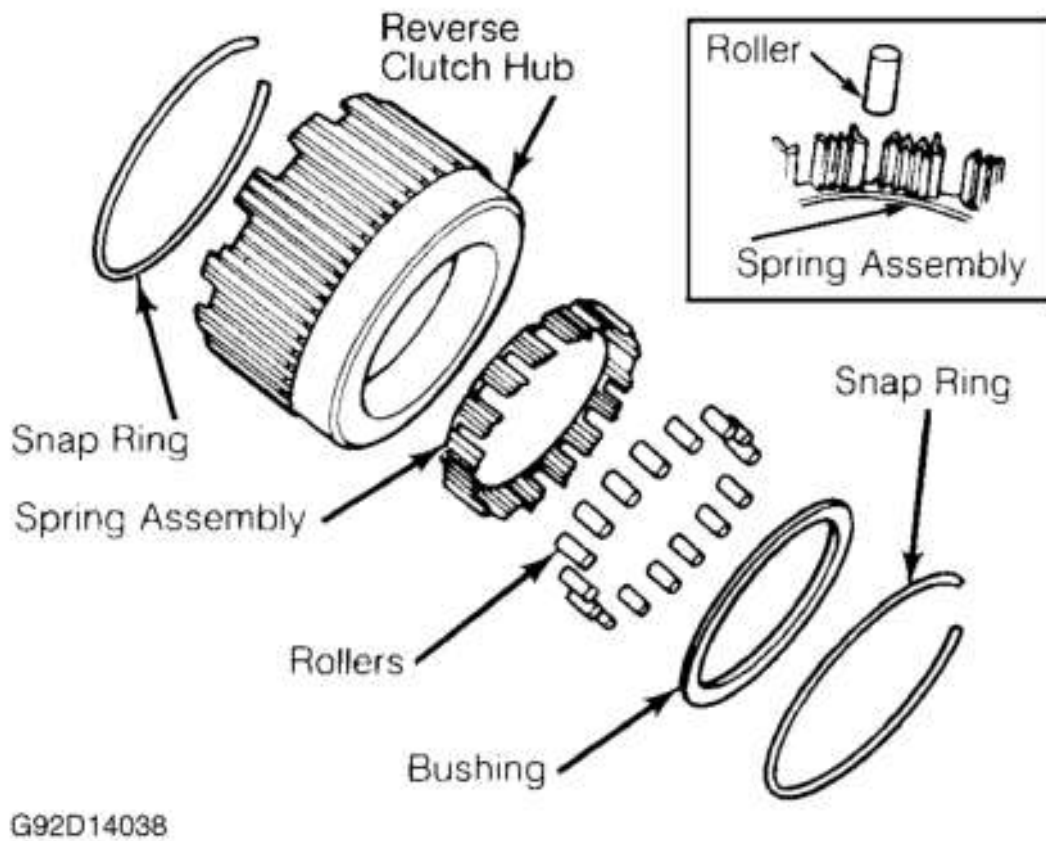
Exploded View Of Low-Reverse One-Way Clutch Hub
